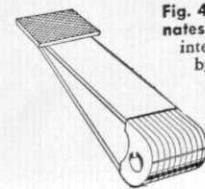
Saves 73%, Eliminates Broaching. Hub with integral key is produced by stacking stampings in assembly. Arm is 10 gauge, brake formed and welded to hub. Cost is only 31¢. Weighs 2.2 pounds.
